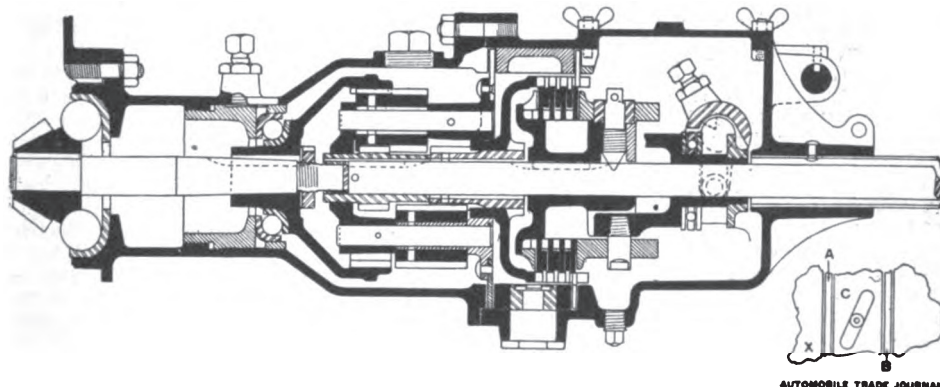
Sectional view of the Brush enclosed planetary change gear. This change gear forms a unit with the jack shaft illustrated in Fig. 8, and is suspended from the side frame members by the jack shaft brackets and in front at a single point, thus giving a three-point suspension. Plain and ball bearings are used, and instead of fans acting on drums friction rings, as described in the text, are employed giving exceptionally smooth action.
